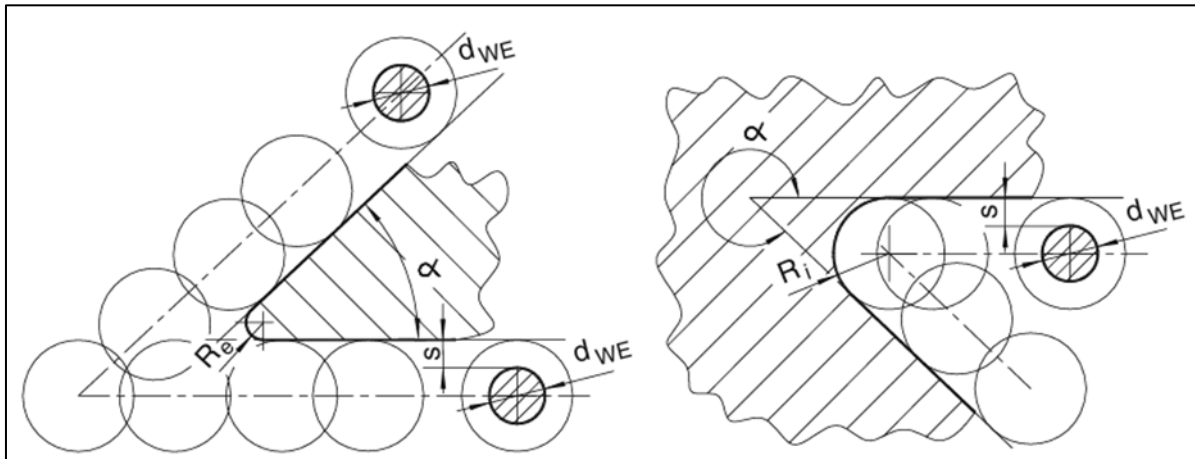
WEDM corners: (a) inner radius, (b) outer radius [29]
